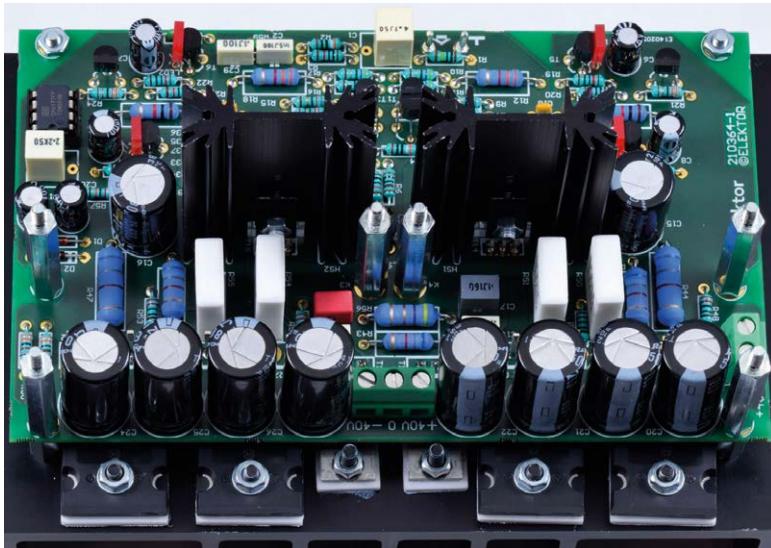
Top view of the finished amp PCB with the output stage transistors secured to the heatsink.
